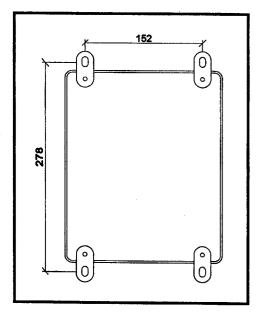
Mounting Arrangement Using Supplied Mounting Kit
